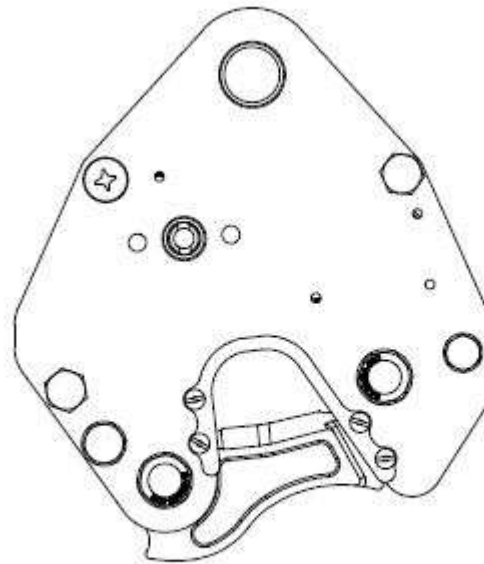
Model 350 ADEC™ Right Side Exploded View (Internals)
